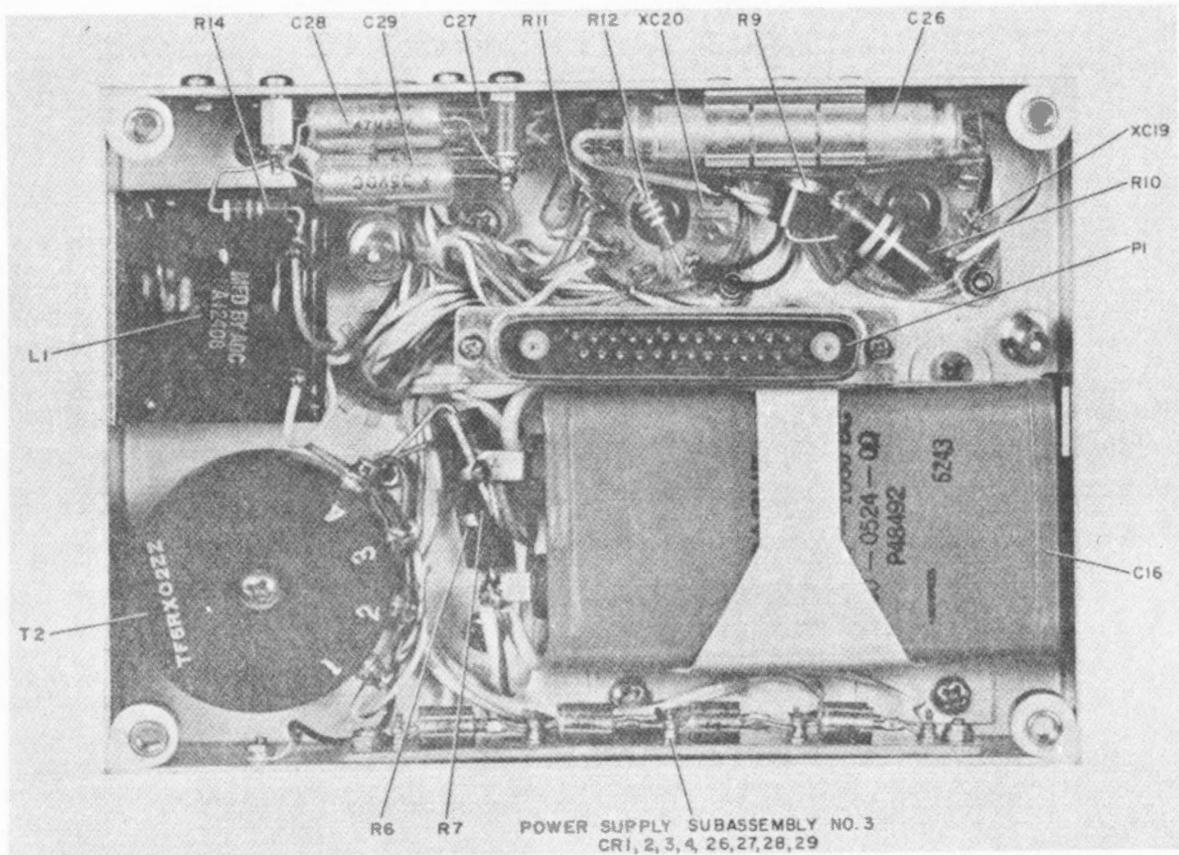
Power Supply PP-3518/PRC-47 (A5), Bottom View, Location of Major Components and Component Mounting Board Subassembly No. 3, Parts Location
